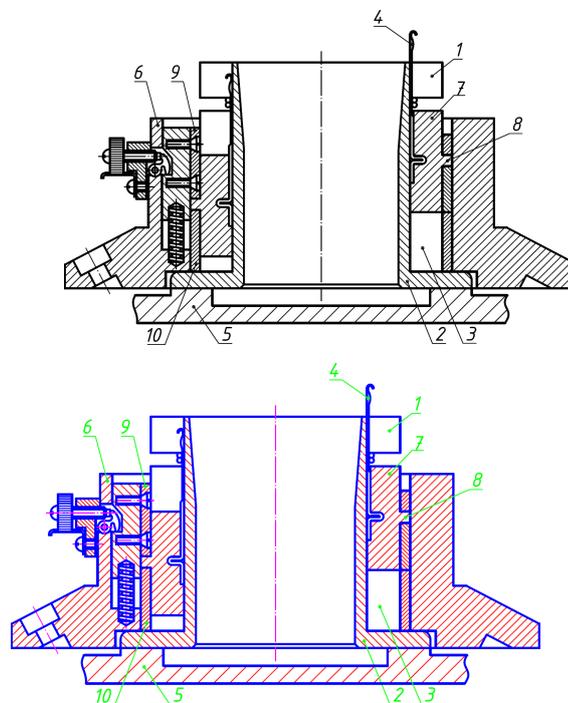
The common form of the developed by mechanism of the binding of the circular binding knitting machine, which contains the composite cylinder: 1 – the upper part of the composite needle cylinder; 2 – change by the heads of different diameters and classes with grooves 3 for uvular needles 4; 5 – lower part with the constant diameter; 6 – the ring of the units of the needle locks; 7 – the pushers; 8 – the heel of the pushers 7; 9 and 10 – the wedges [3].
